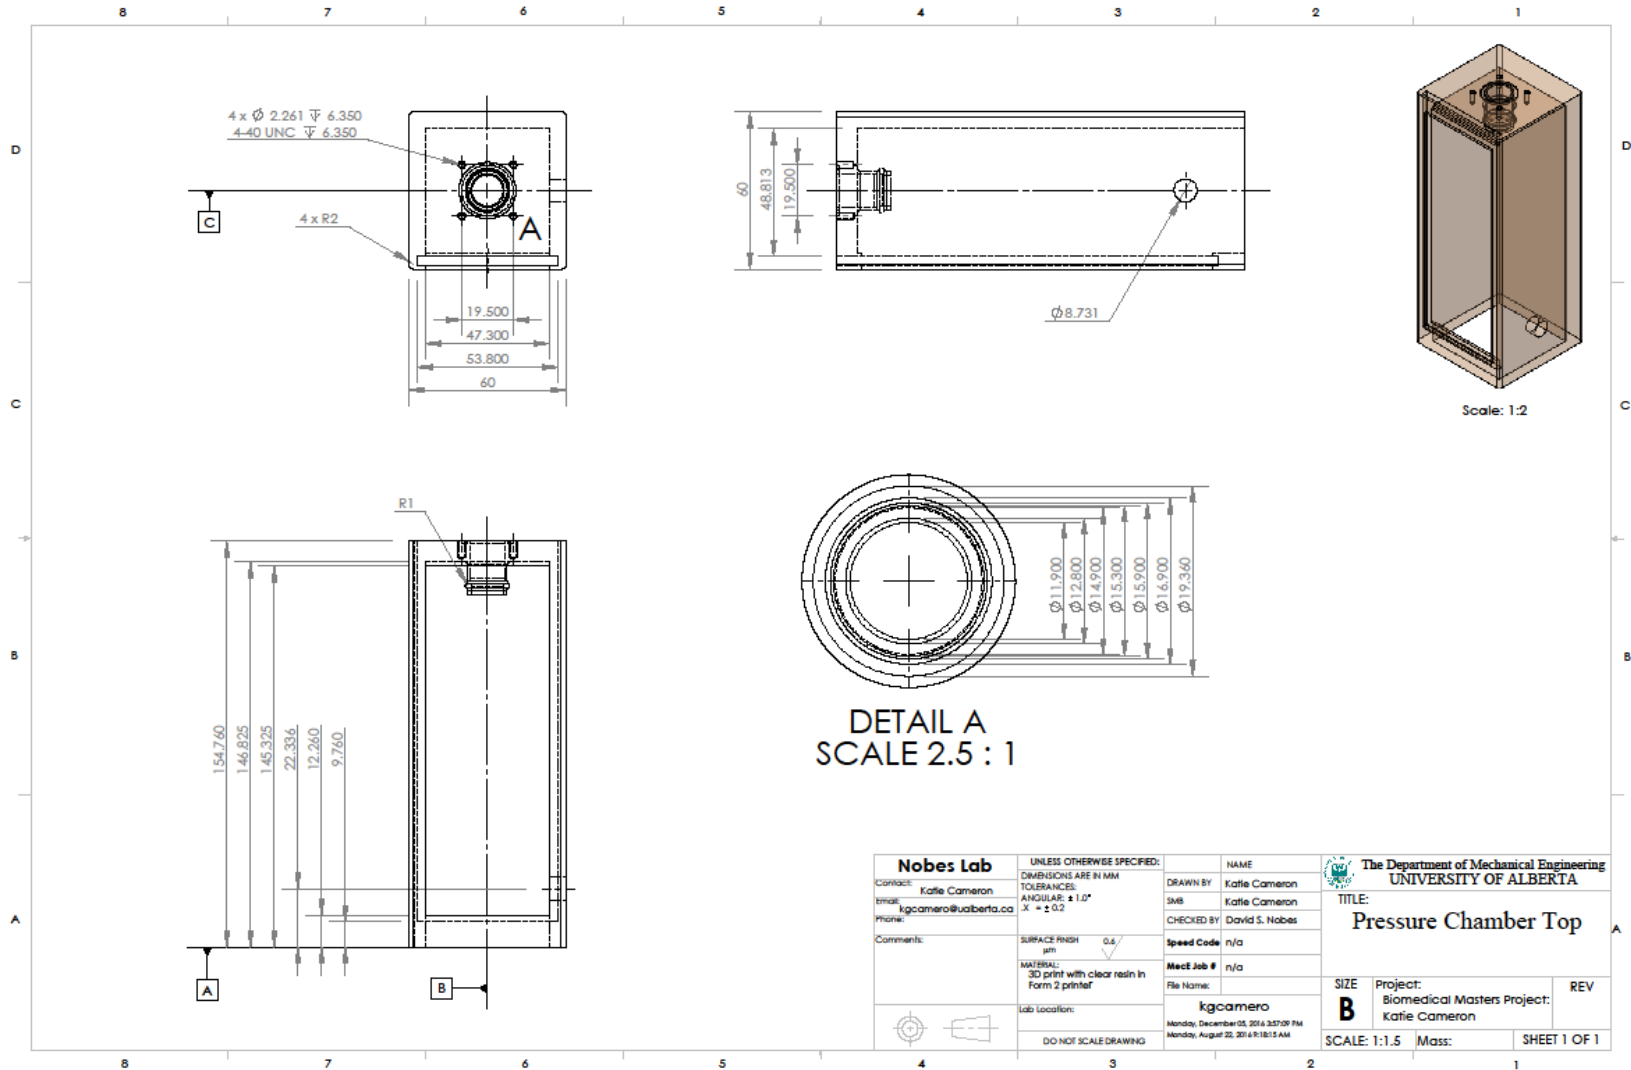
Detailed drawing of mock aorta pressure chamber top
